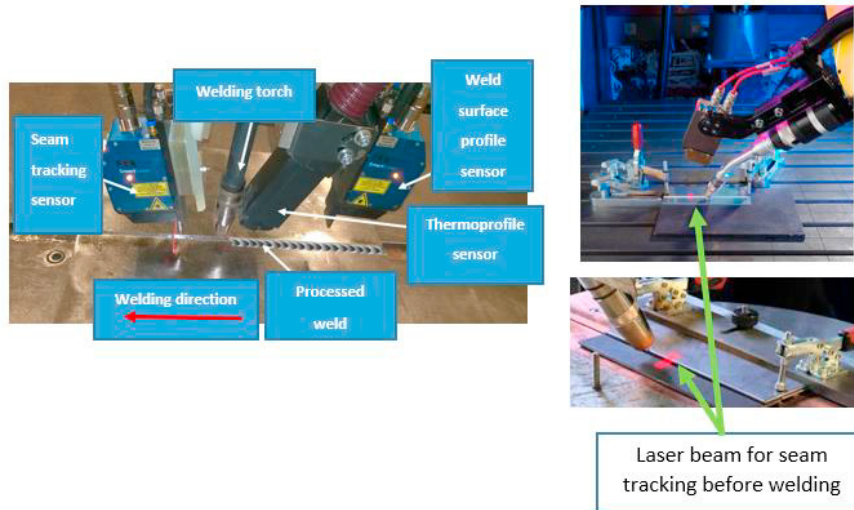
Illustration of seam tracking and thermo-profile measurement of welding parameters for AI control.
